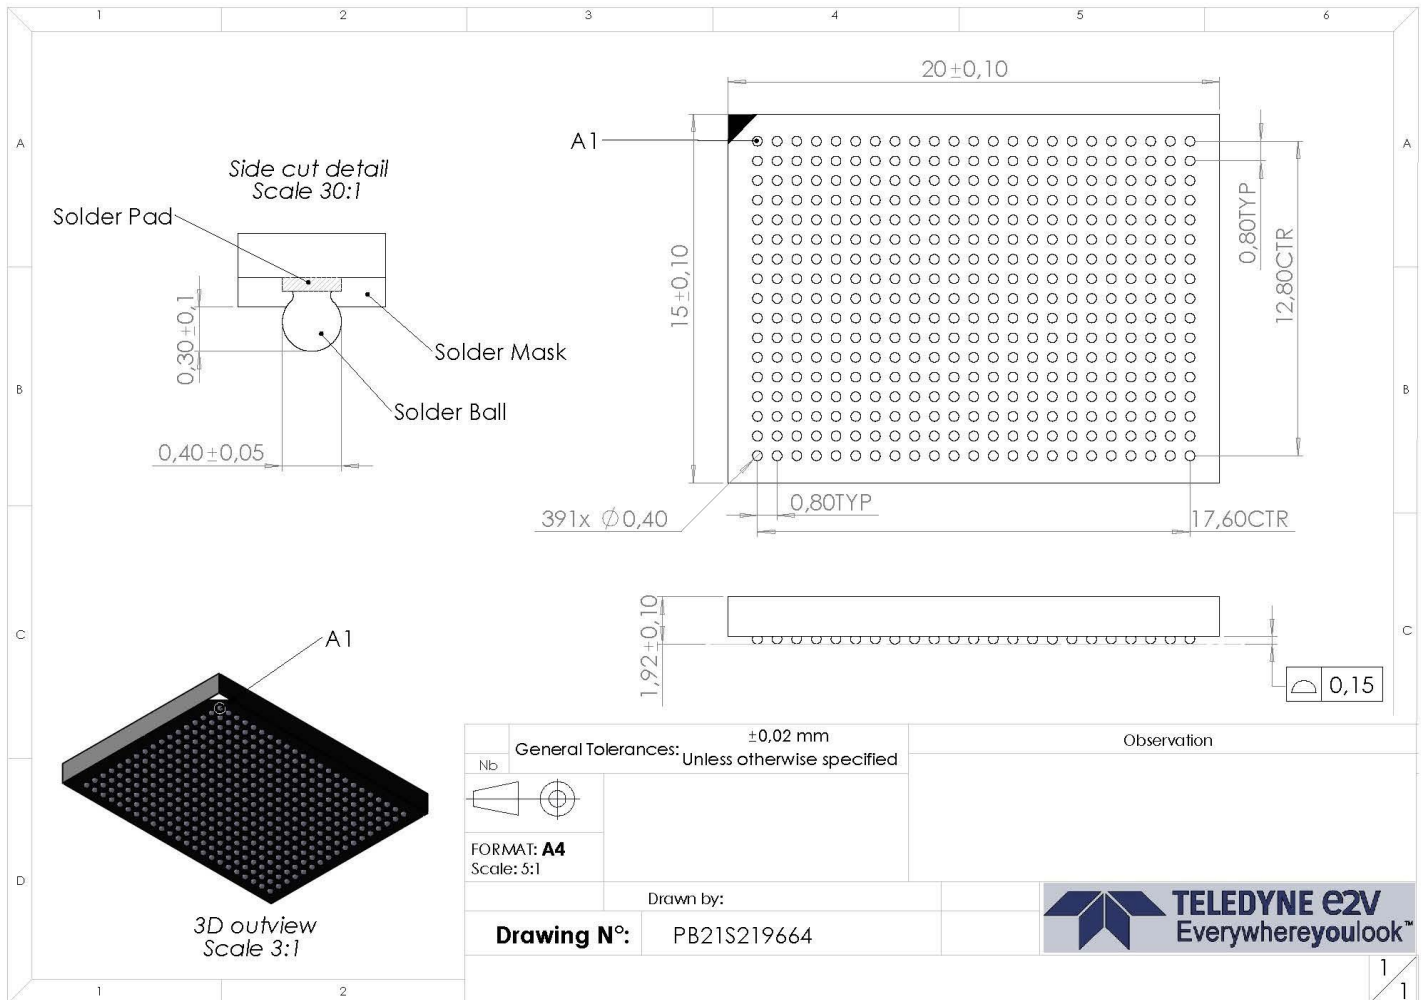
MECHANICAL OUTLINE - PACKAGE DETAILS
